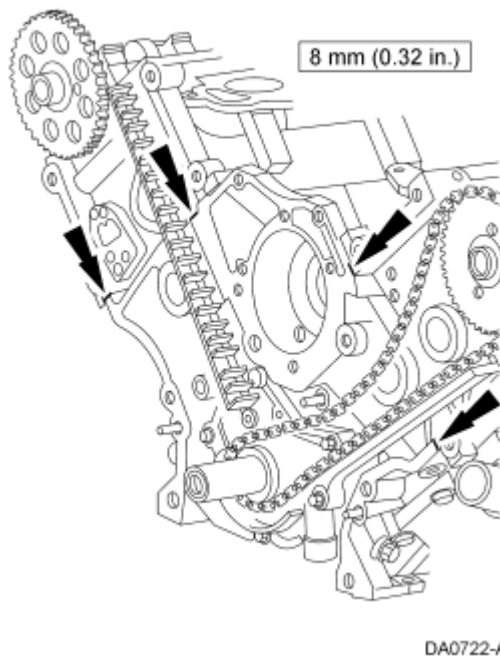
Applying Bead Of Silicone Gasket And Sealant Along Cylinder Head-To-Cylinder Block Surface
